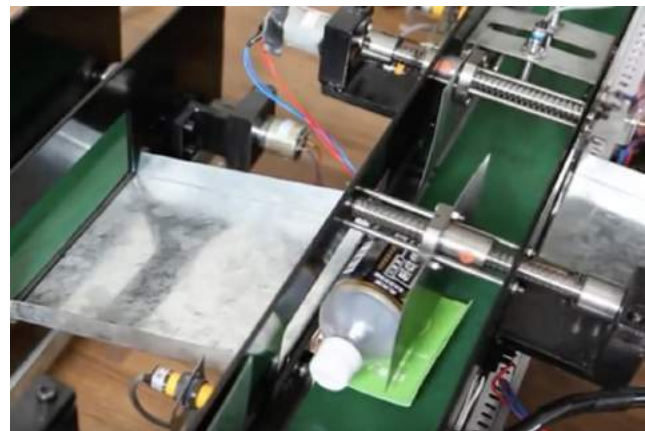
Piston Pushing A Bottle On A Conveyor Belt [16]
